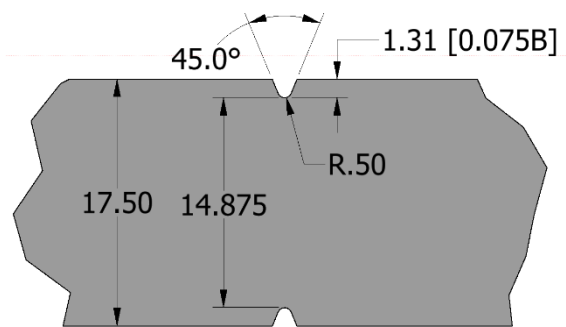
Details of the side grooves for each specimen. Total reduction in thickness is $0.15B$ (all linear dimensions in mm). Note that dimensions given were provided for the purpose of machining and are not the as-tested condition, which require careful measurement prior to testing.
